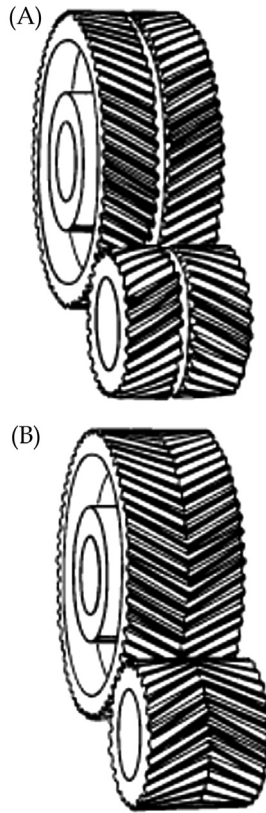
(A) Double helical gear; (B) herringbone gear.
